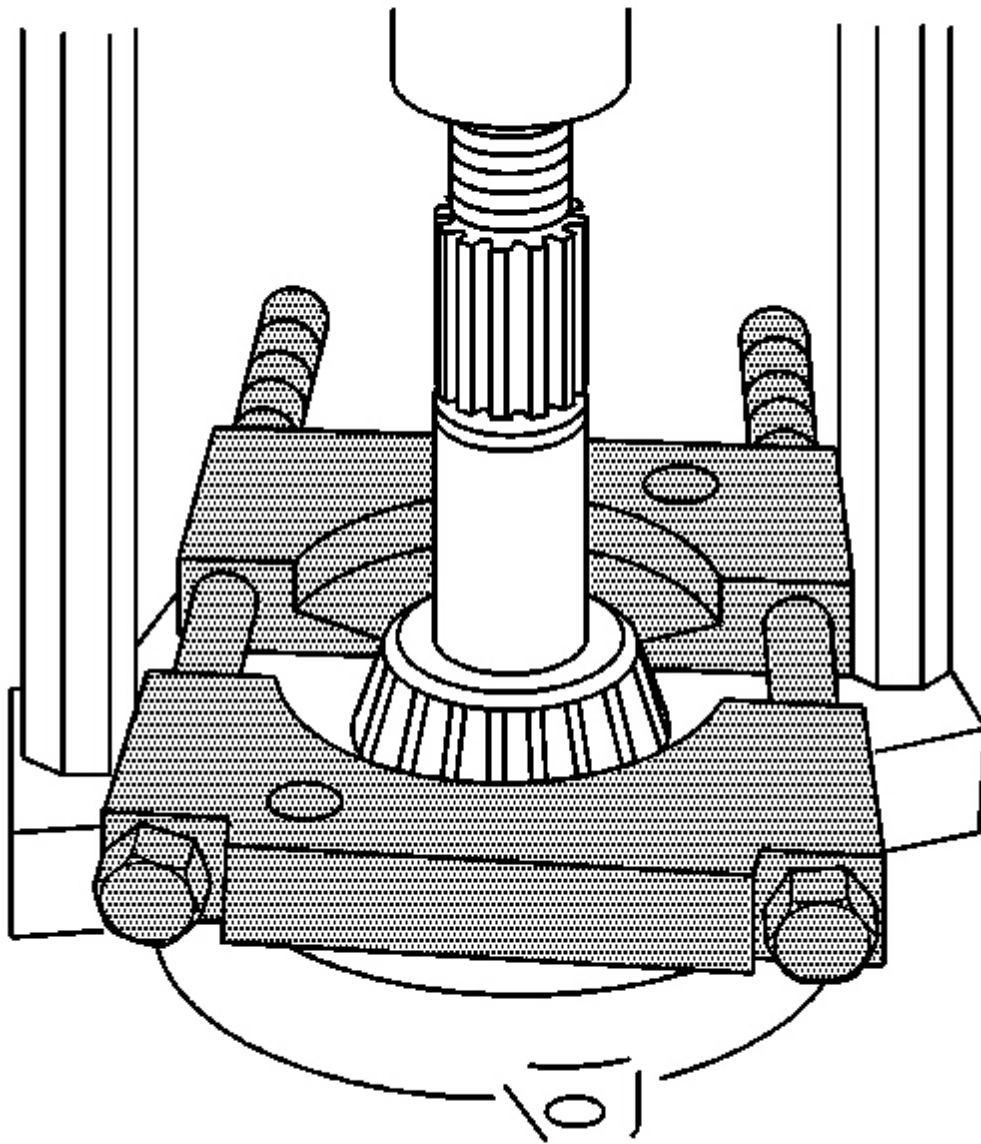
Removing The Inner Pinion Bearing Using J 22912-01
